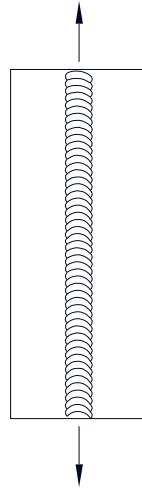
Longitudinal tensile test of welded specimen
